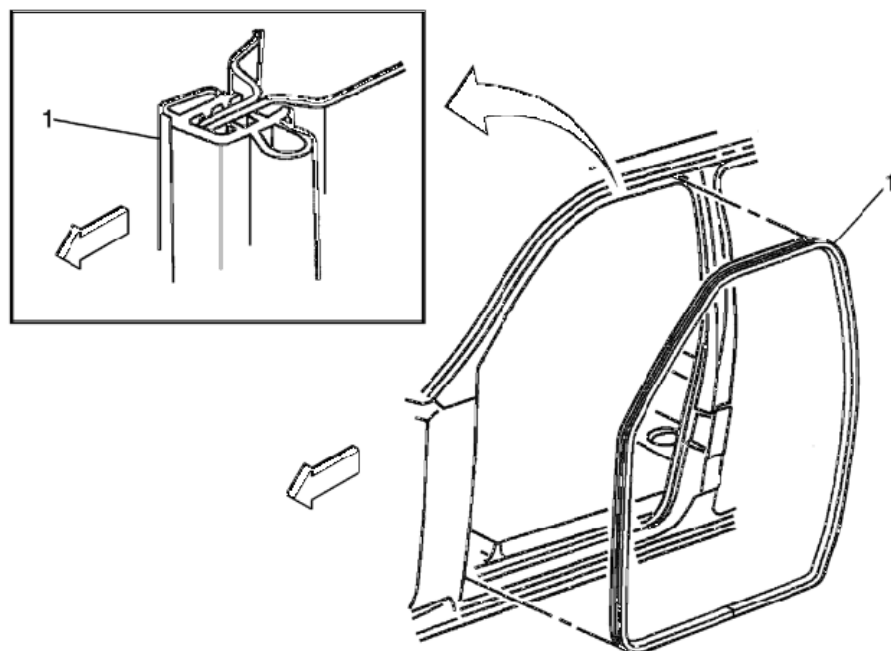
Identifying Front Side Door Auxiliary Weatherstrip - Body Side
